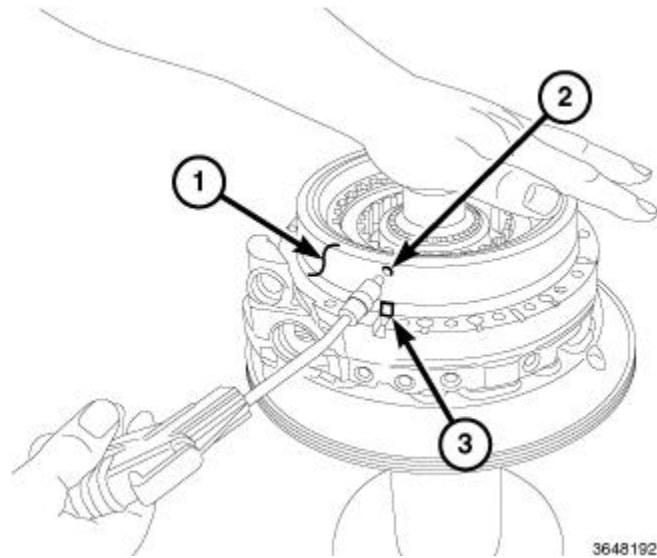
B-Piston, Hole & B-Piston Alignment Tab
